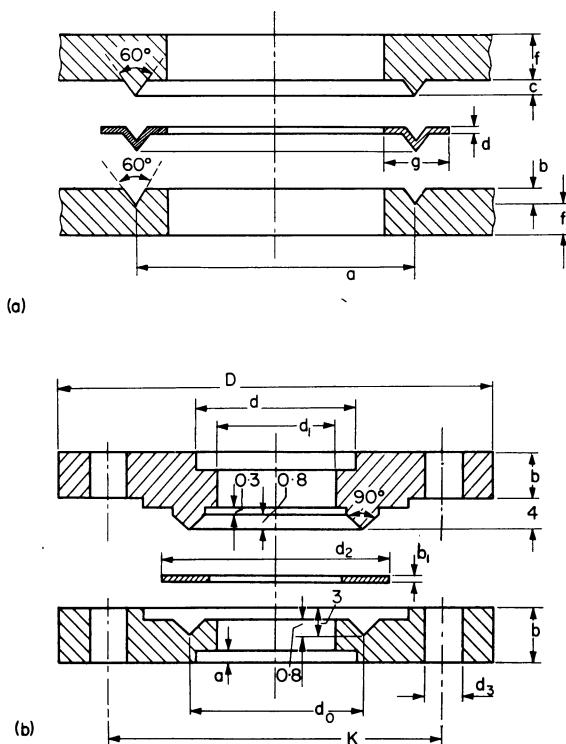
Dimensions of thin gasket, groove and knife-edge seals (Table 3.41)
